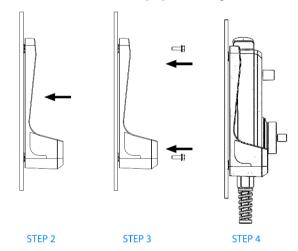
Mechanical Mounting of Remote Pendant Cradle
